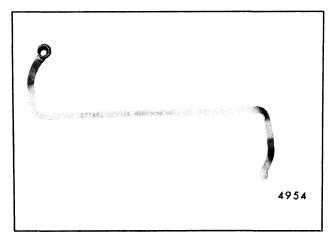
Front Door Hinge Tool J-24353 - "A, B, C, E and F" Styles
